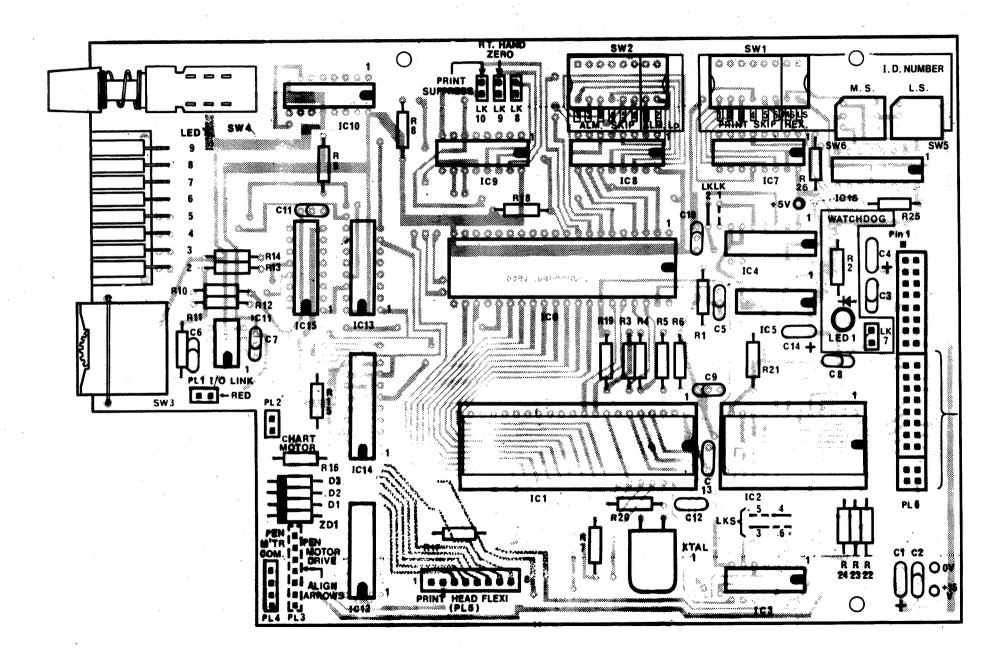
CONTROL BOARD, PCB COMPONENT LAYOUT (Drawing No.AH127424. Issue 3)
